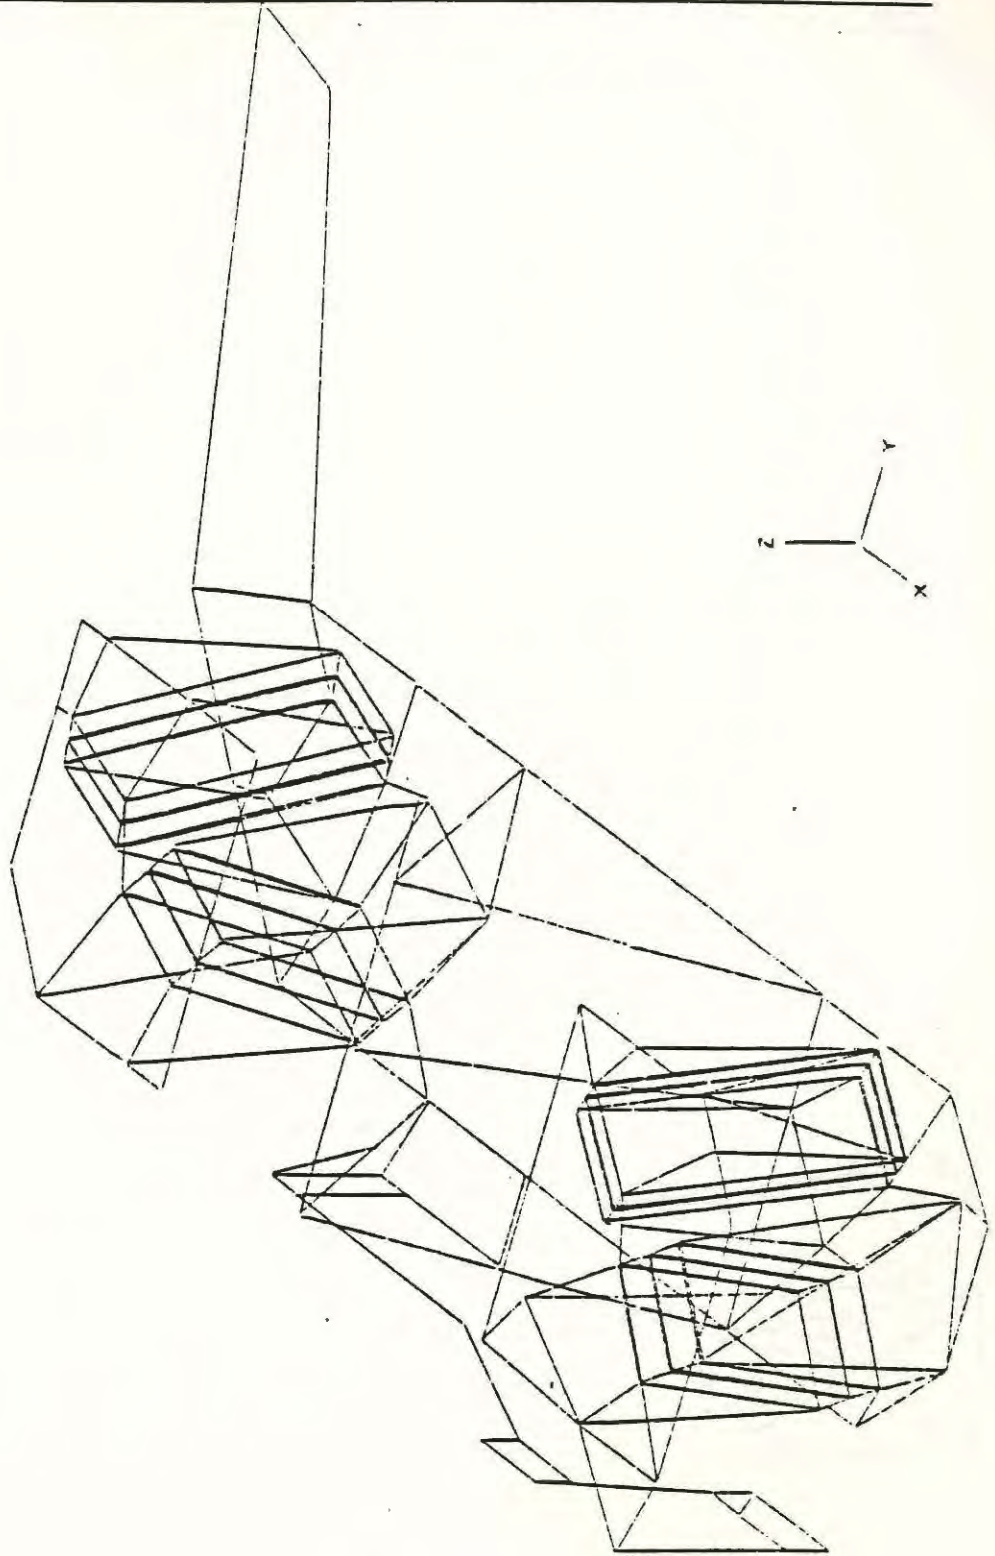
JOURNAL HOUSING - Steering Side; Element Group 4.
